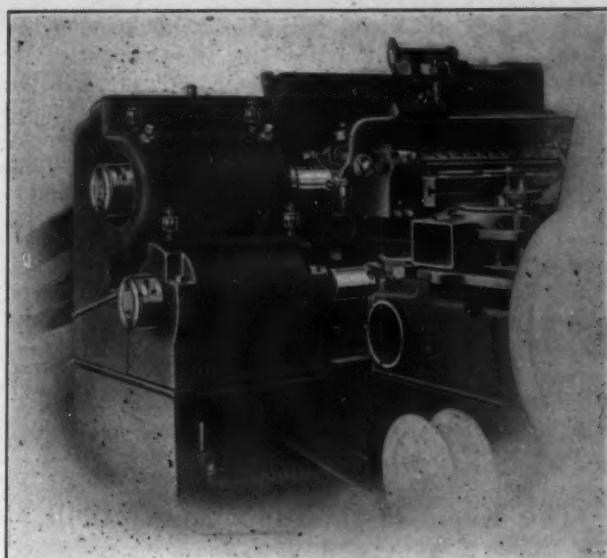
Detail Showing the Flexible Couplings Connecting the Pulley Shafts to the Cutterheads.
